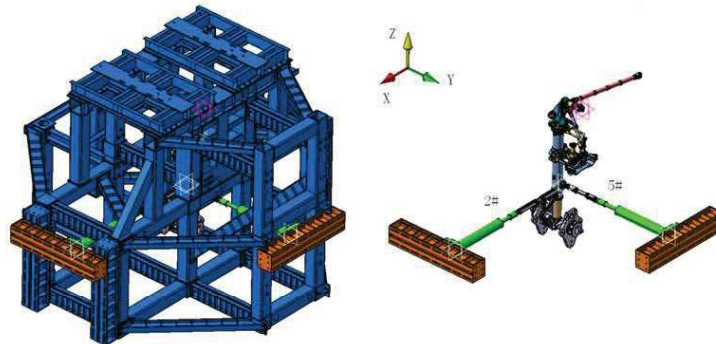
Loading Scheme of Upper Lock Position Testing
